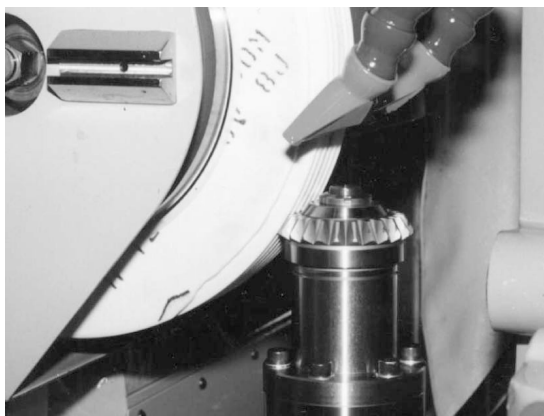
Grinding of conical gear with Reishauer-type gear grinding machine
